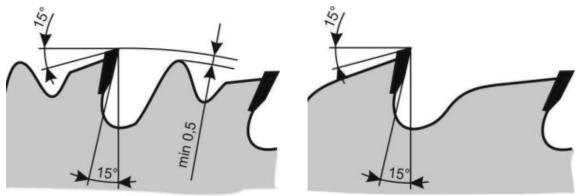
Detail of 24-teeth saw blades: (a) saw blade with chip limiter; and (b) without chip limiter
